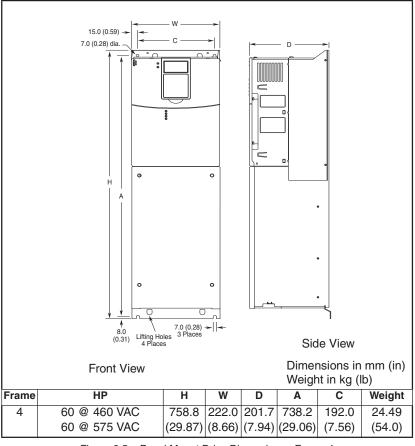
Panel Mount Drive Dimensions - Frame 4
